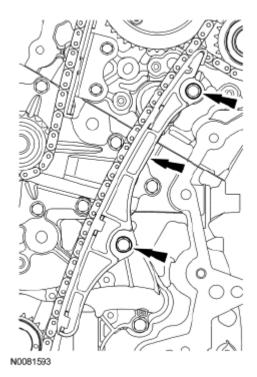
Locating Primary Timing Chain Tensioner Arm Courtesy of FORD MOTOR CO.
